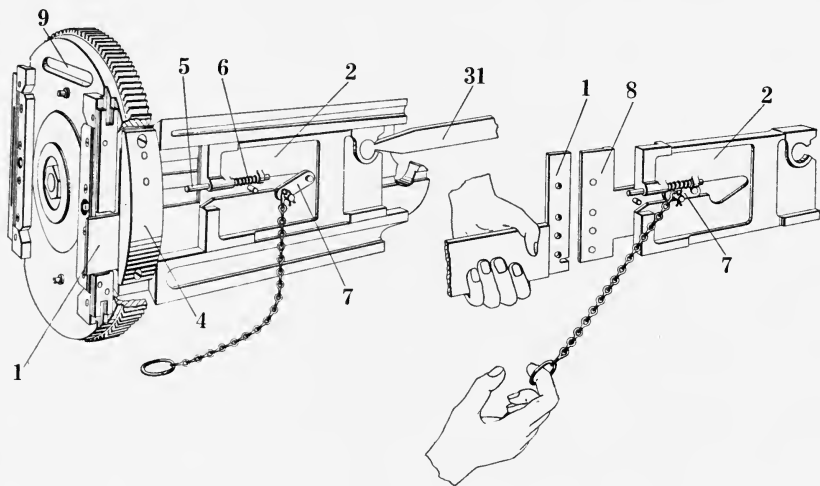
The Single Ejector. Part of the rim of the mold disk has been broken away and the mold cap has been removed to show how the ejector blade passes through the casting cell of the mold to eject a slug.
